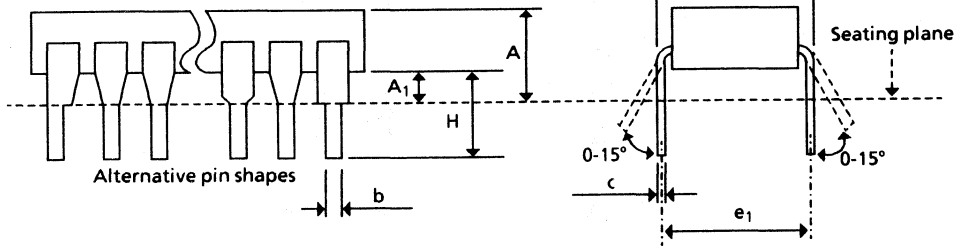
64-Lead Ceramic DIL (solder seal) - package style C
